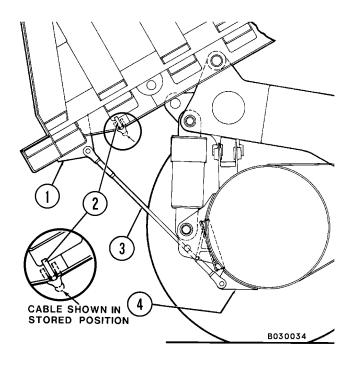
BODY-UP CABLE INSTALLATION
